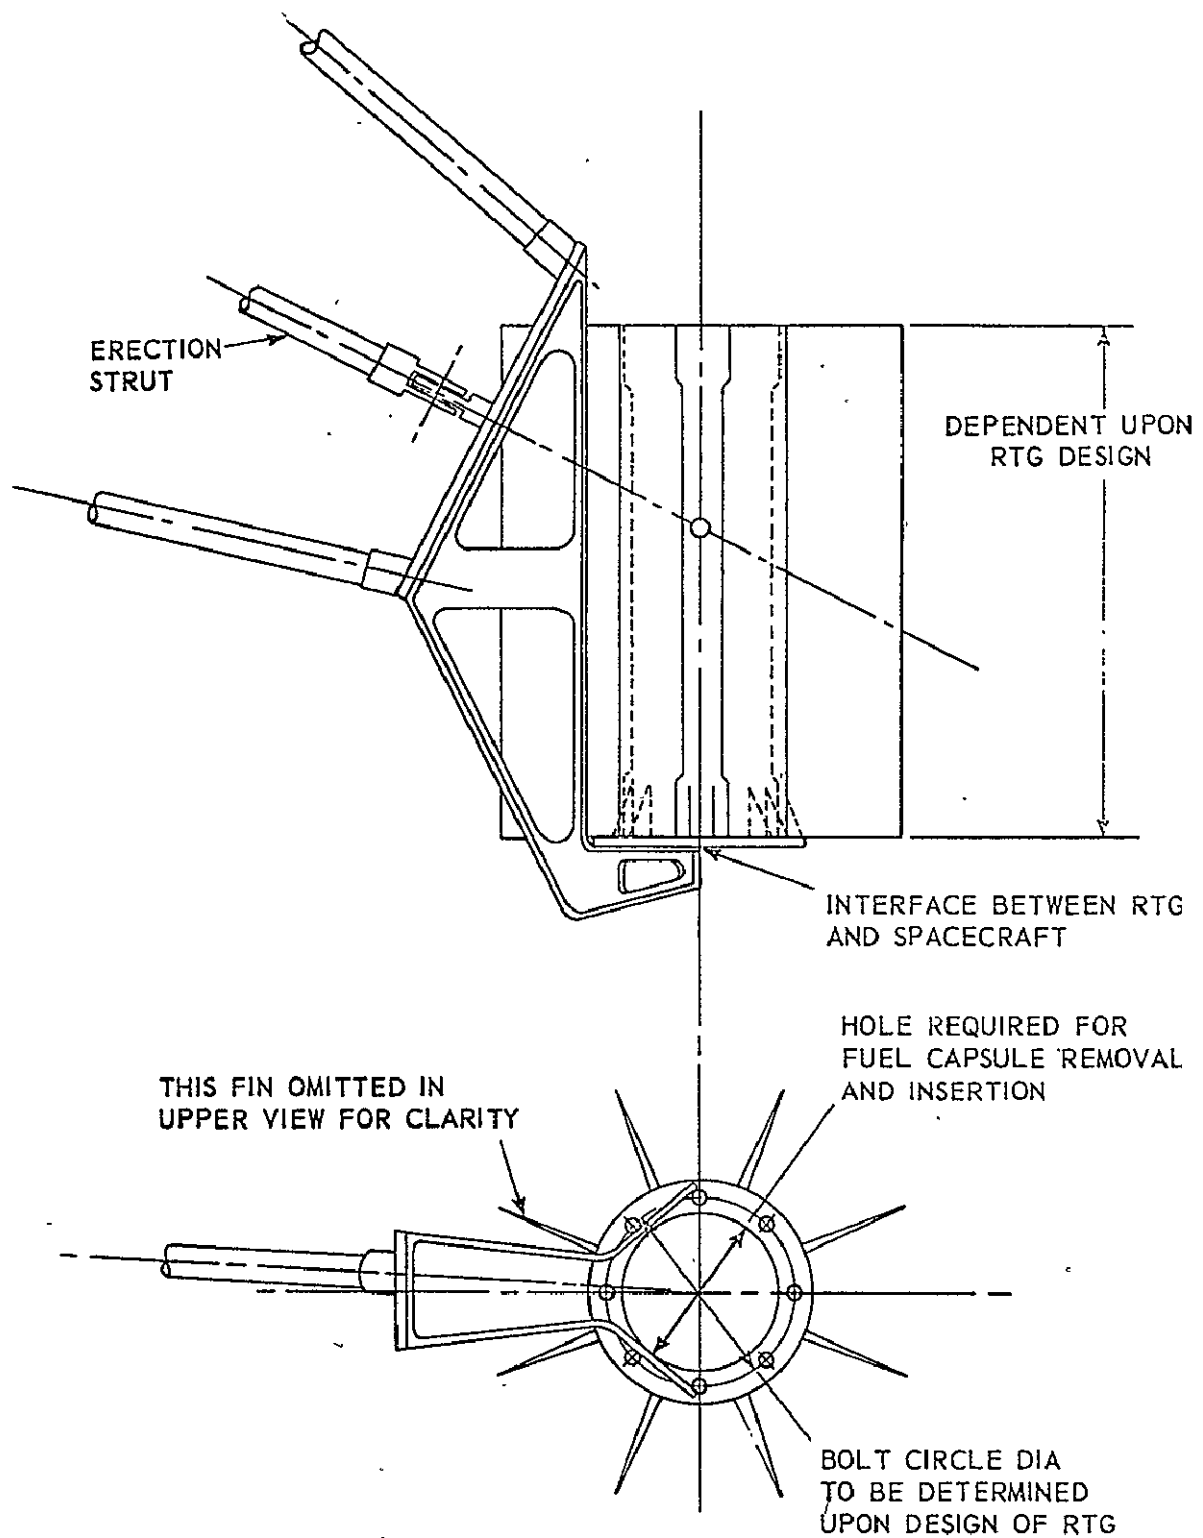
RTG Power System — Spacecraft Mechanical Interface Drawing (SK-GSFC-701-1) (Sheet 1 of 3)
